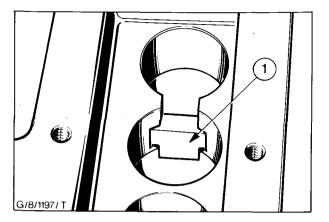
Tappet Locating 'T' Pieces (Dorset) 1. 'T' Piece
